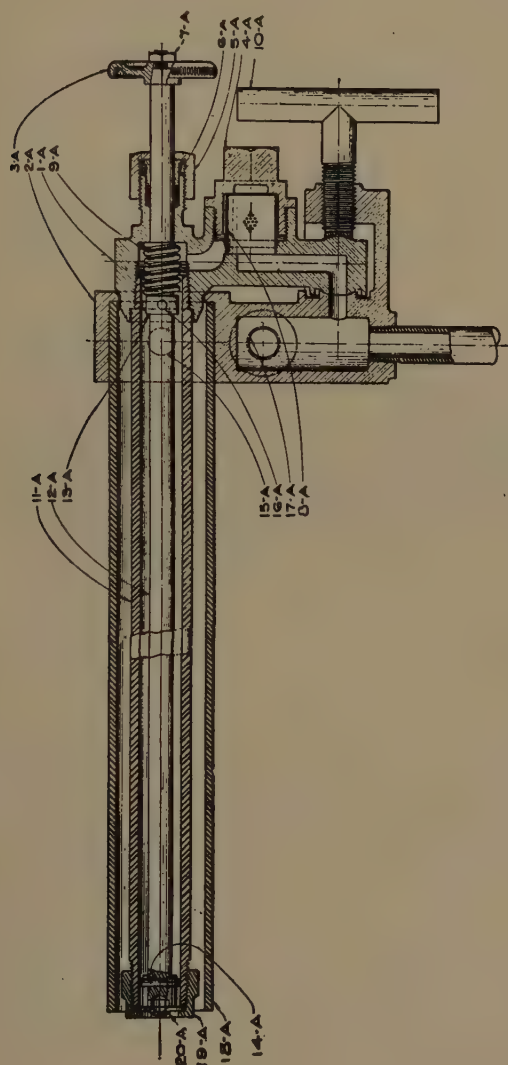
Coen Adjustable Mechanical Atomizing Burner. 1-A. Burner valve. 2-A. Burner socket. 3-A. Hand wheel. 4-A. Strainer nut. 8-A. Strainer. 9-A. Tension spring. 10-A. Socket clamp. 11-A. Burner tube. 12-A. Adjusting rod. 13-A. Adjusting rod collar. 14-A. Regulating pin. 15-A. Burner tip. 18-A. Guide pipe. 19-A. Tip clamp nut. 20-A. Burner tip.
